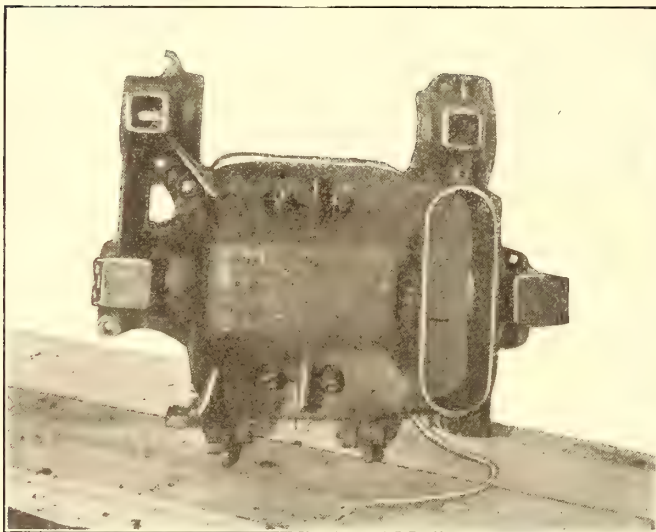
MOTOR FRAMES AND MOLD FOR WELDING
